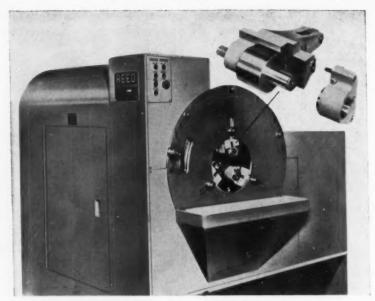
Reed thread-rolling machine redesigned for greater versatility
